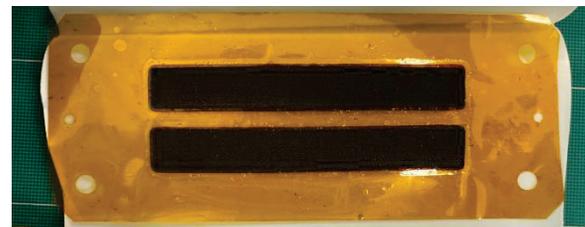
Demonstrated ability to fabricate a 2-cell membrane electrode assembly using flexible PCB technology.
